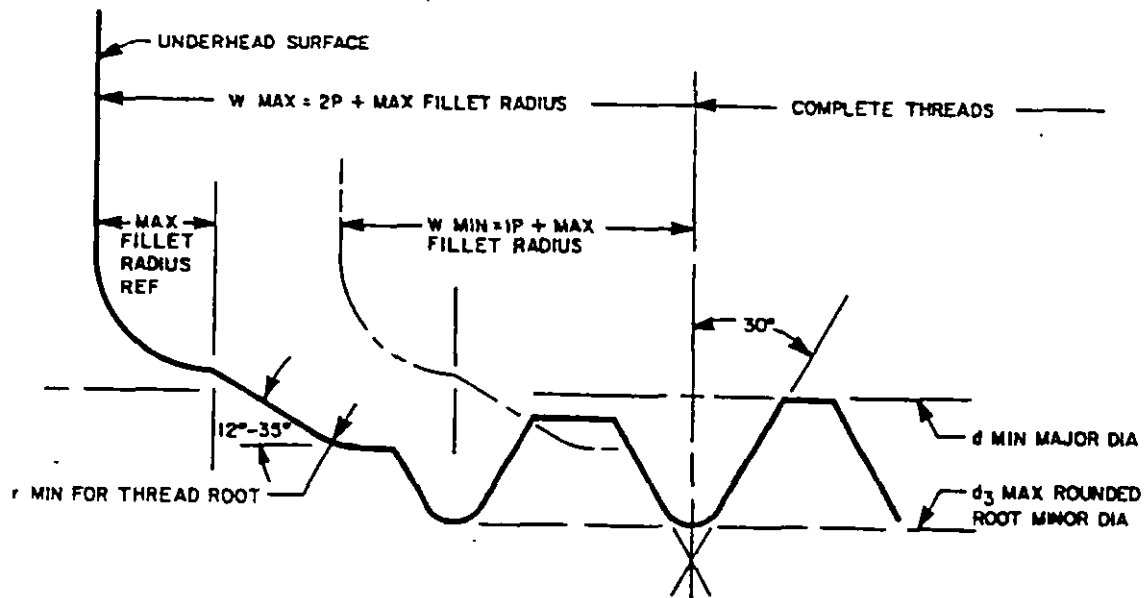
FULL SHANK FASTENER - THREADED TO HEAD
